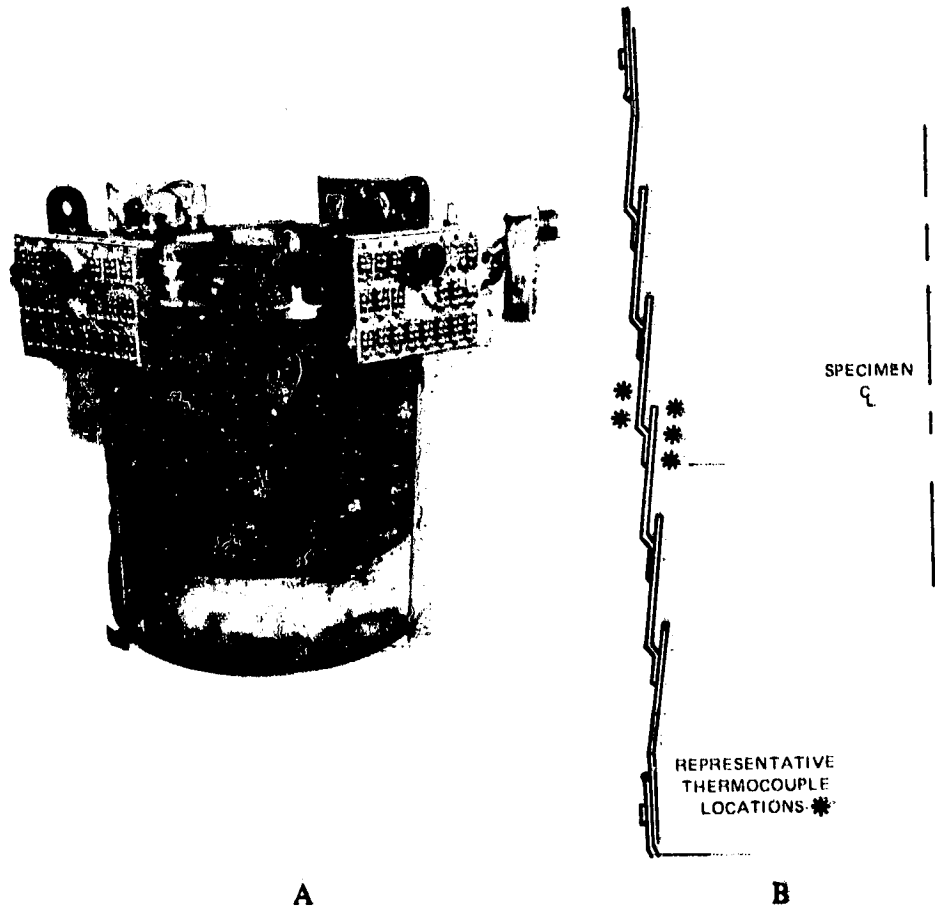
Assembled Liner Test Specimen and Cover (A) and 5-Louver Test Section (B)
